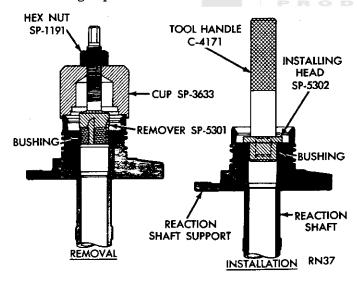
Replacing Reaction Shaft Support Bushing—A-727
